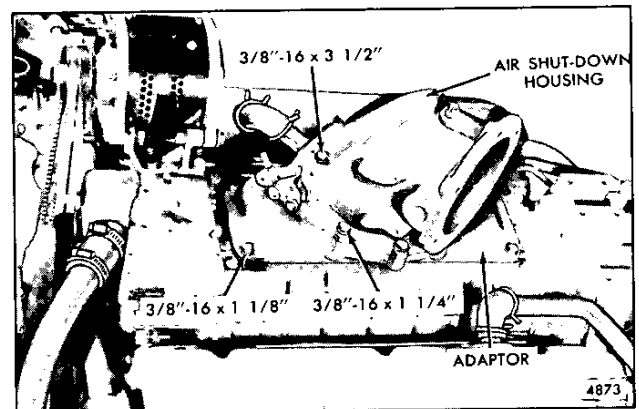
Location of Air Shutdown Housing and Adaptor Mounting Bolts (8V-53 Engines)
